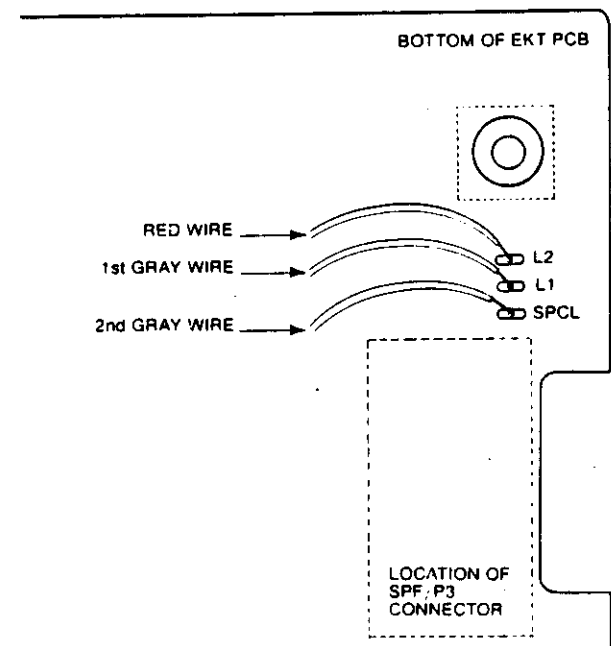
C — VIEW OF UPPER LEFT CORNER OF EKT PCB (FROM BELOW) — WIRE SOLDERING POINTS
